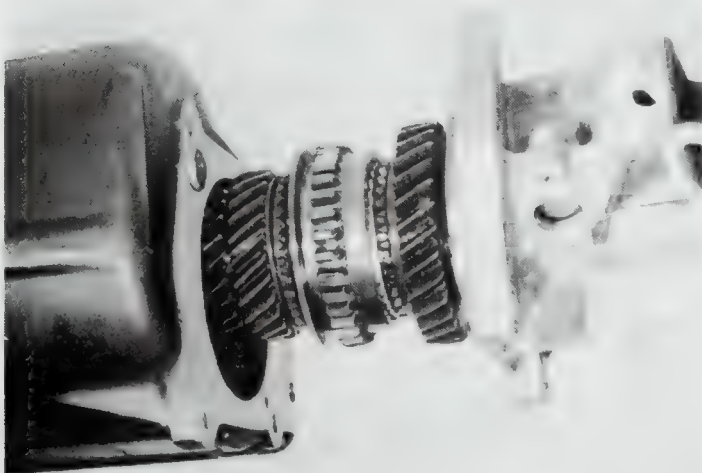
B-52 Extension Housing and Output Shaft Gear Train Removal
